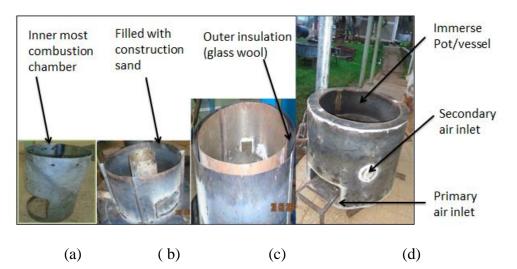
a) Inner combustion chamber, b) combined chamber, c) assembly with insulation holder, d) Assembled body
